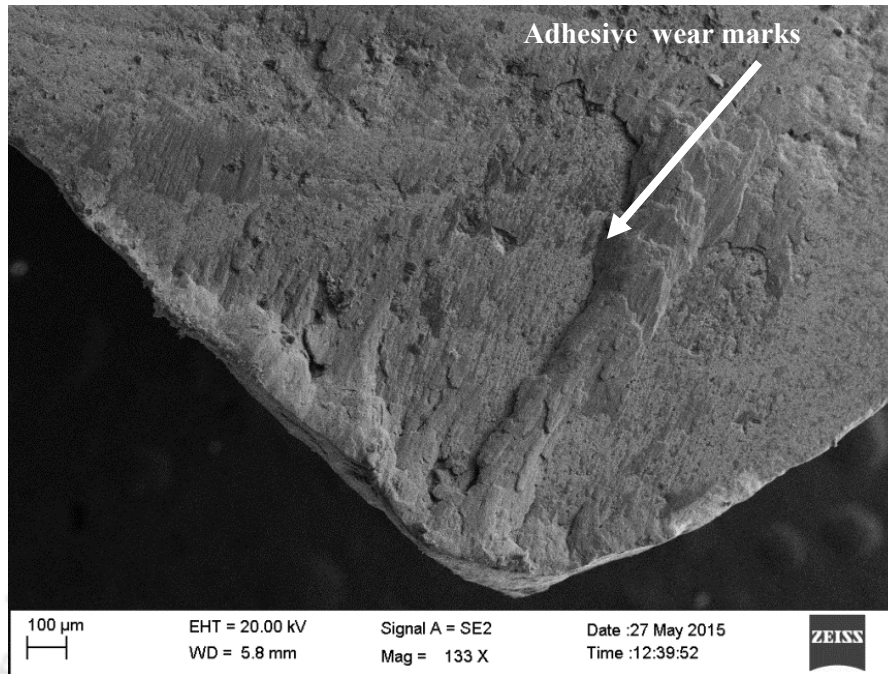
(a) Rake surface of the cutting tool with CaF_2 showing mild wear
